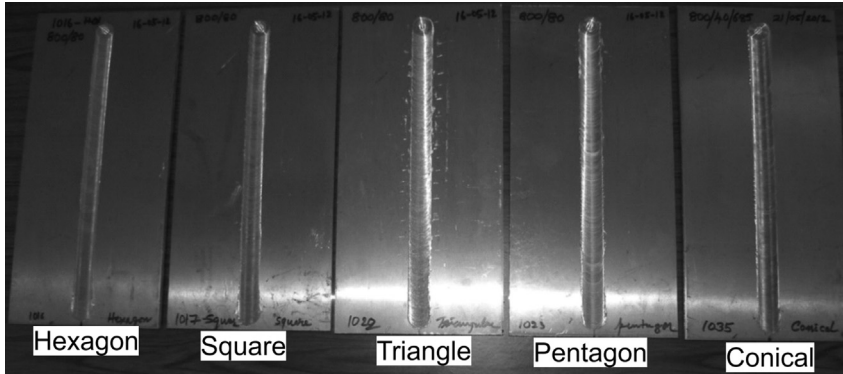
Weld beads of FS welds of five profiles.
